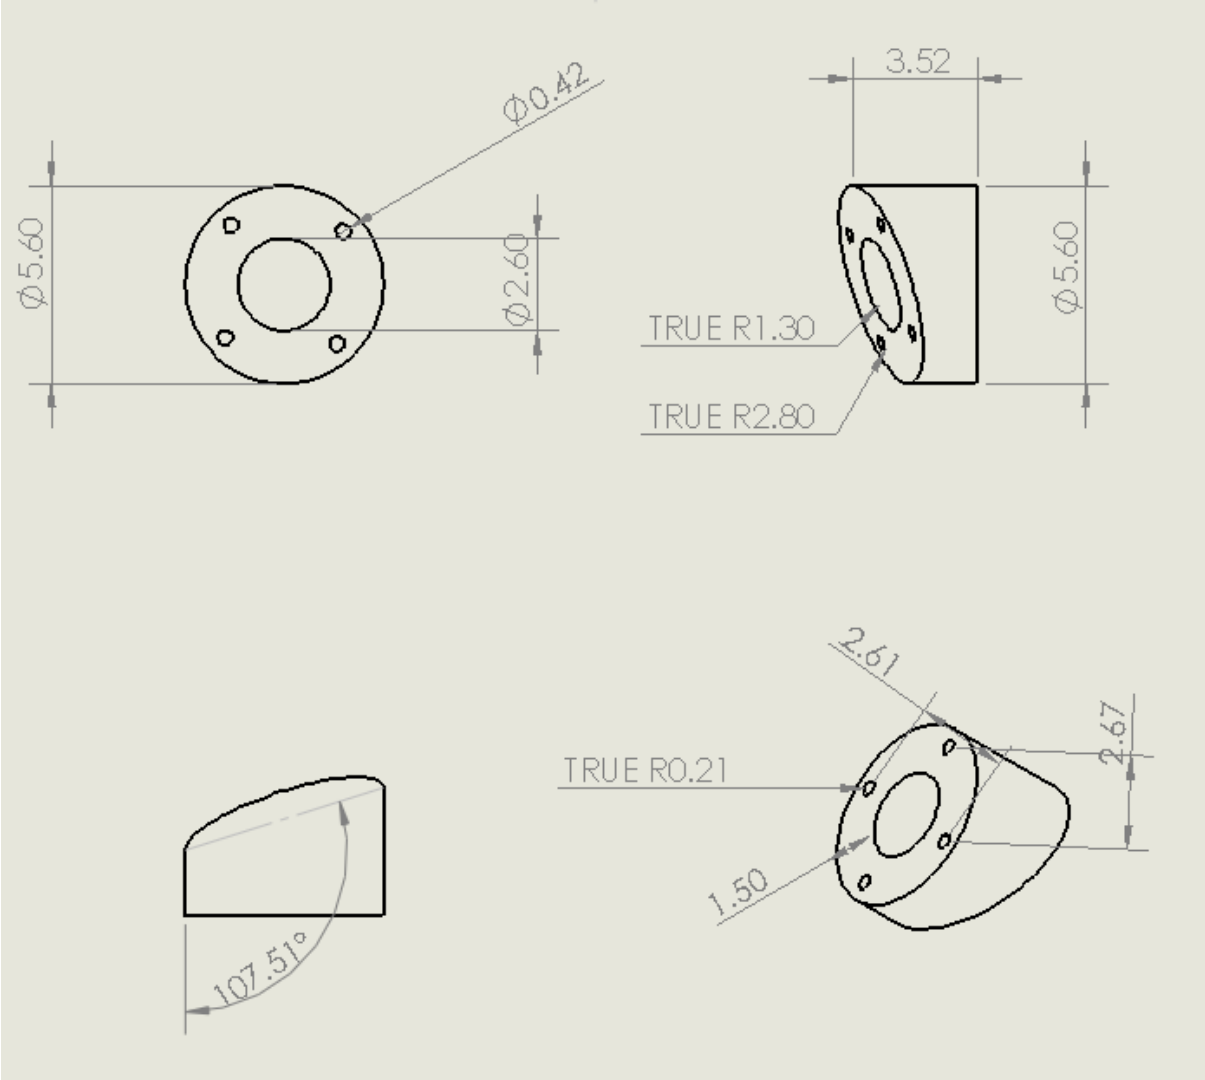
Dimensions of the external component used to increase the pivot angle of the spherical joints (in mm)
